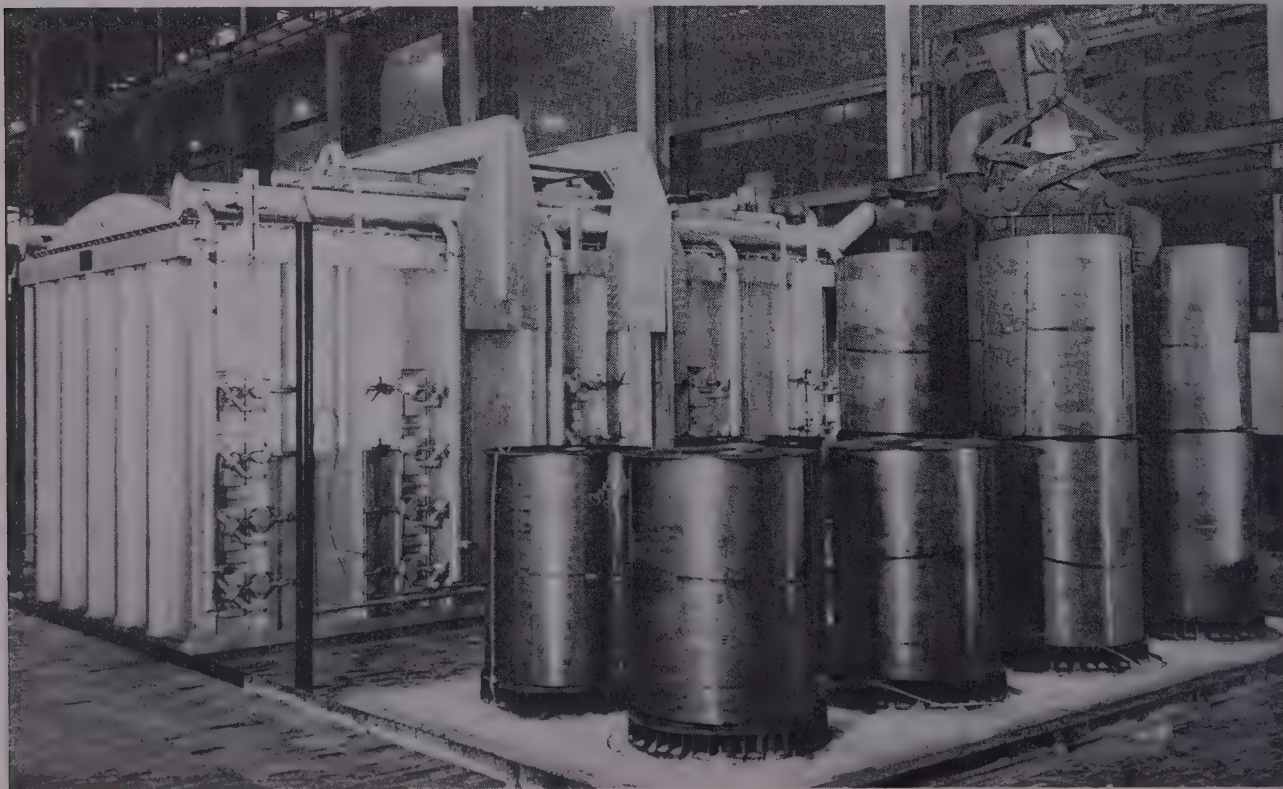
Eductor installation on batch-type annealing furnaces. Furnace Engineers photo
